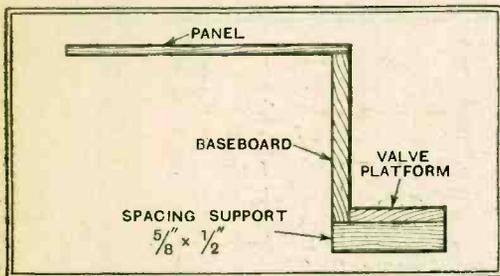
Correct method of assembling frame-work of receiver unit.
